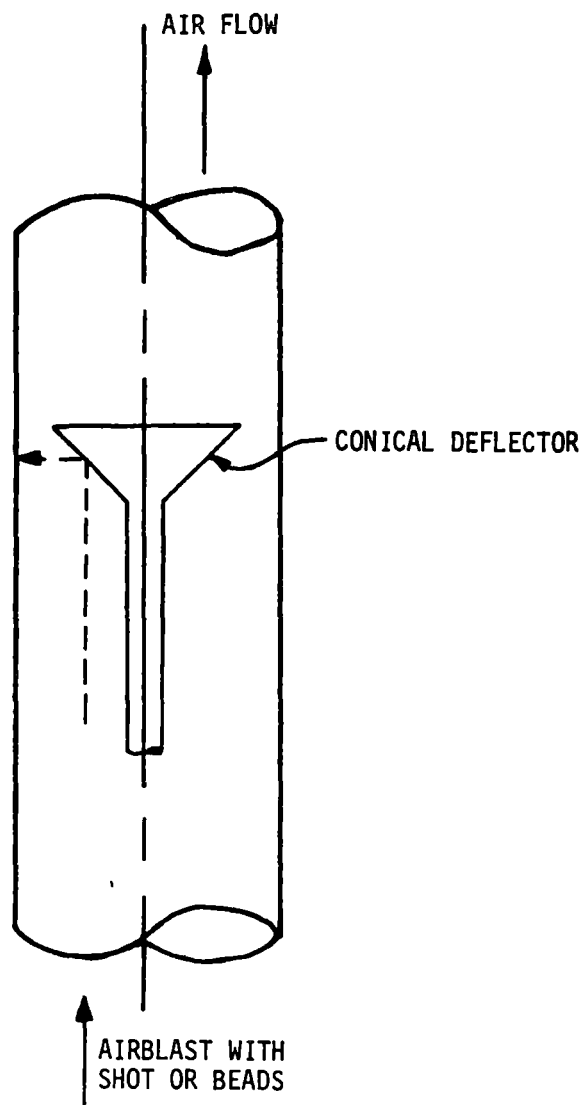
Equipment Used for Shot Peening of Alloy 600 Tubing
